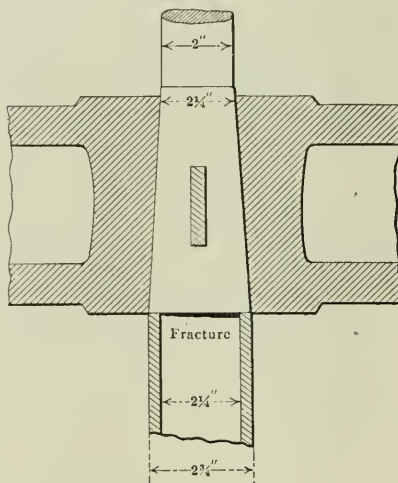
FRACTURE IN PISTON ROD OF AIR PUMP
